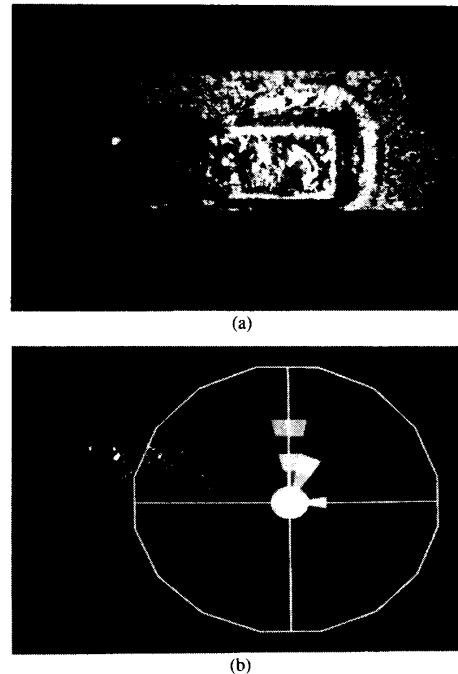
(a) Photograph of the top view of an insufficient solder joint; (b) Gaussian image of the solder joint shown in (a).
